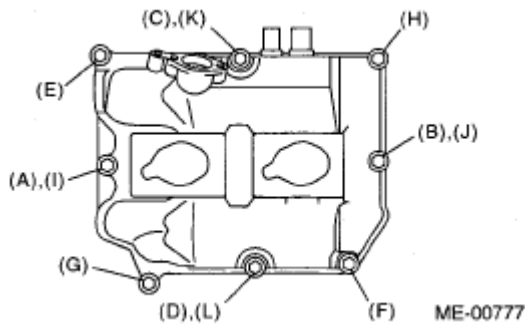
Identifying Rocker Cover Bolts Tightening Sequence
